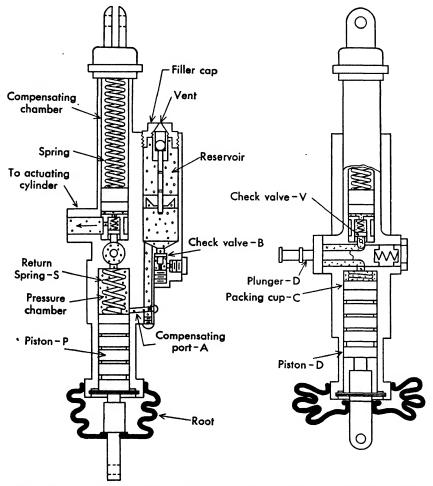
A diagrammatic drawing of a master cylinder for a hydraulic brake system (*Bendix* type).
